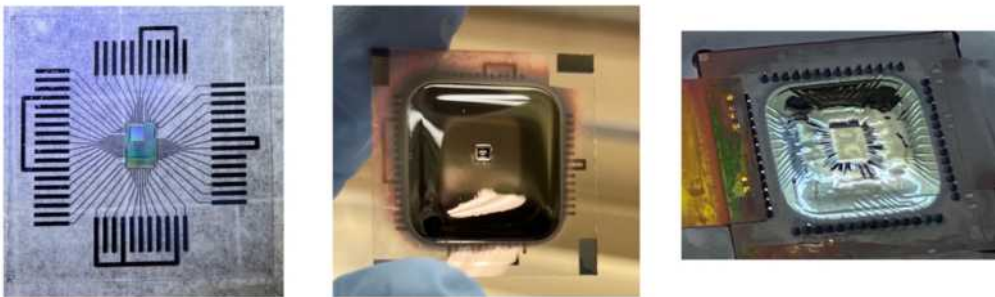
Left* shows TopmetalSe flip-chip package pre amorphous Selenium coating, *Middle* shows TopmetalSe coated with 545 μm of aSe. *Right* shows wire-bonded device with aSe coating.
